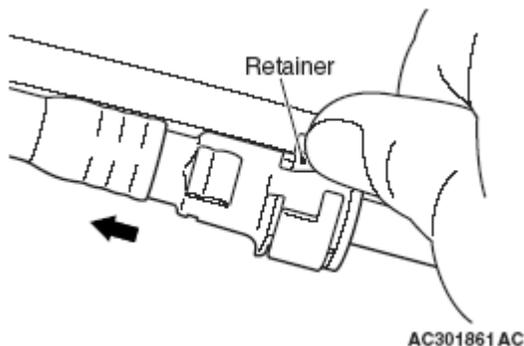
Raising Retainer Of Fuel High-Pressure Hose
